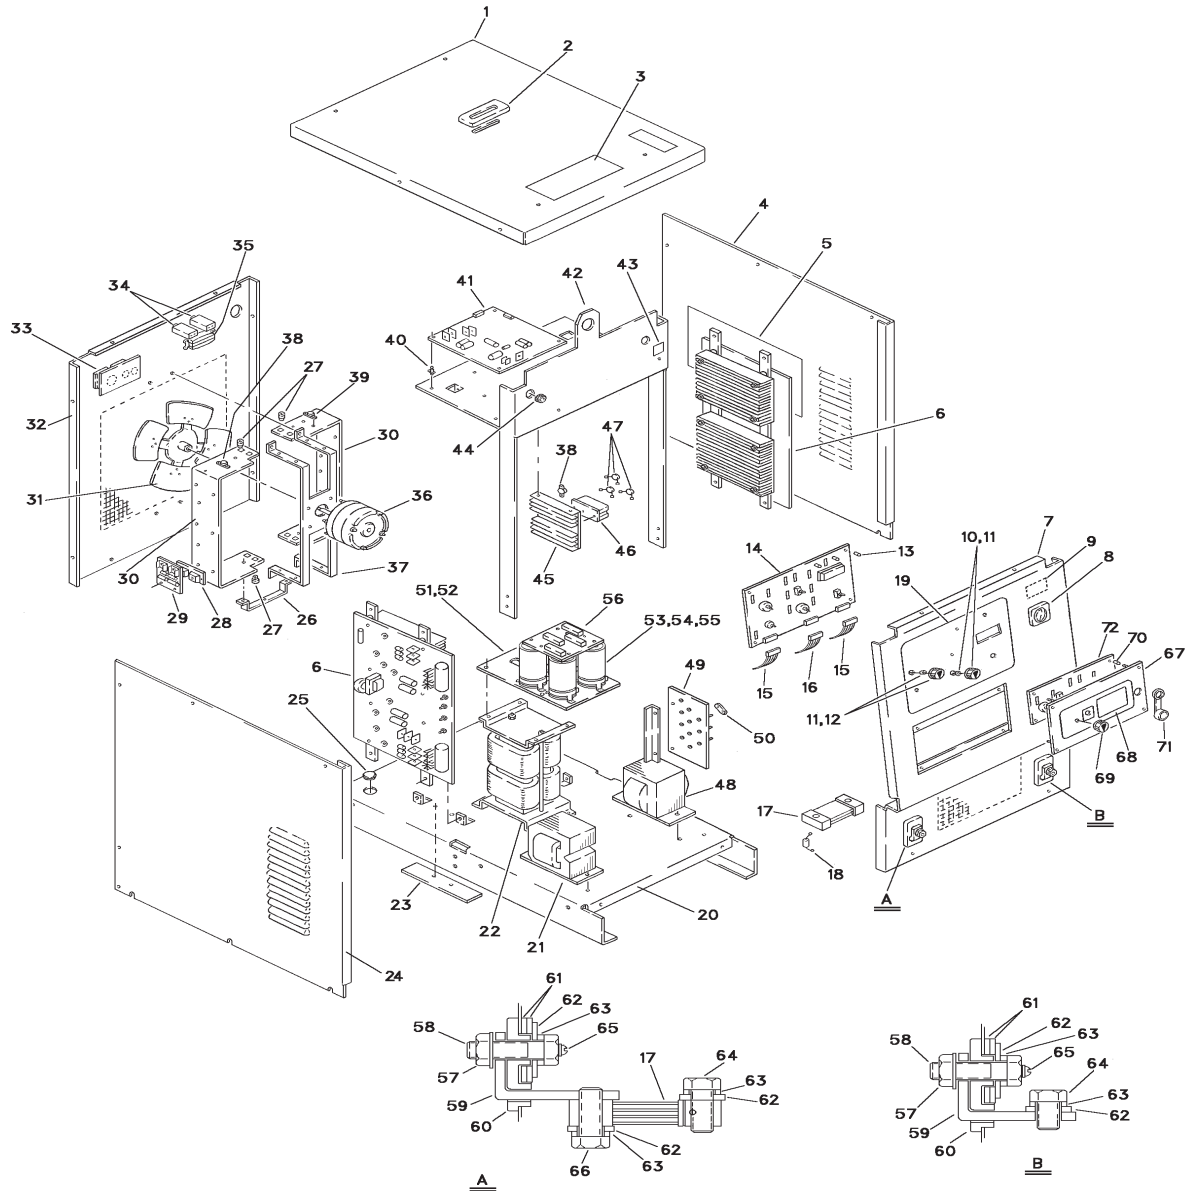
Arc-Master 501 Welder Assembly
